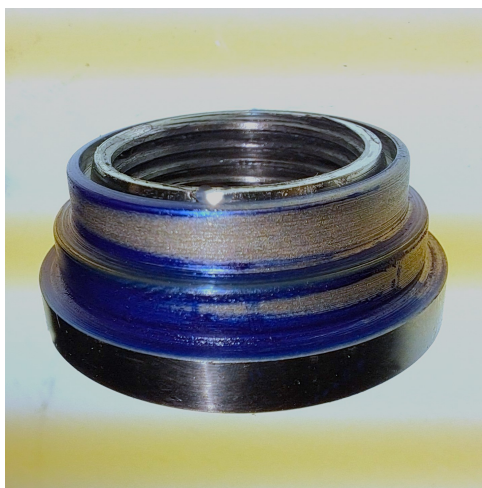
Assessing contact of the parts using engineer's blue, after lapping using improved lathe setup
